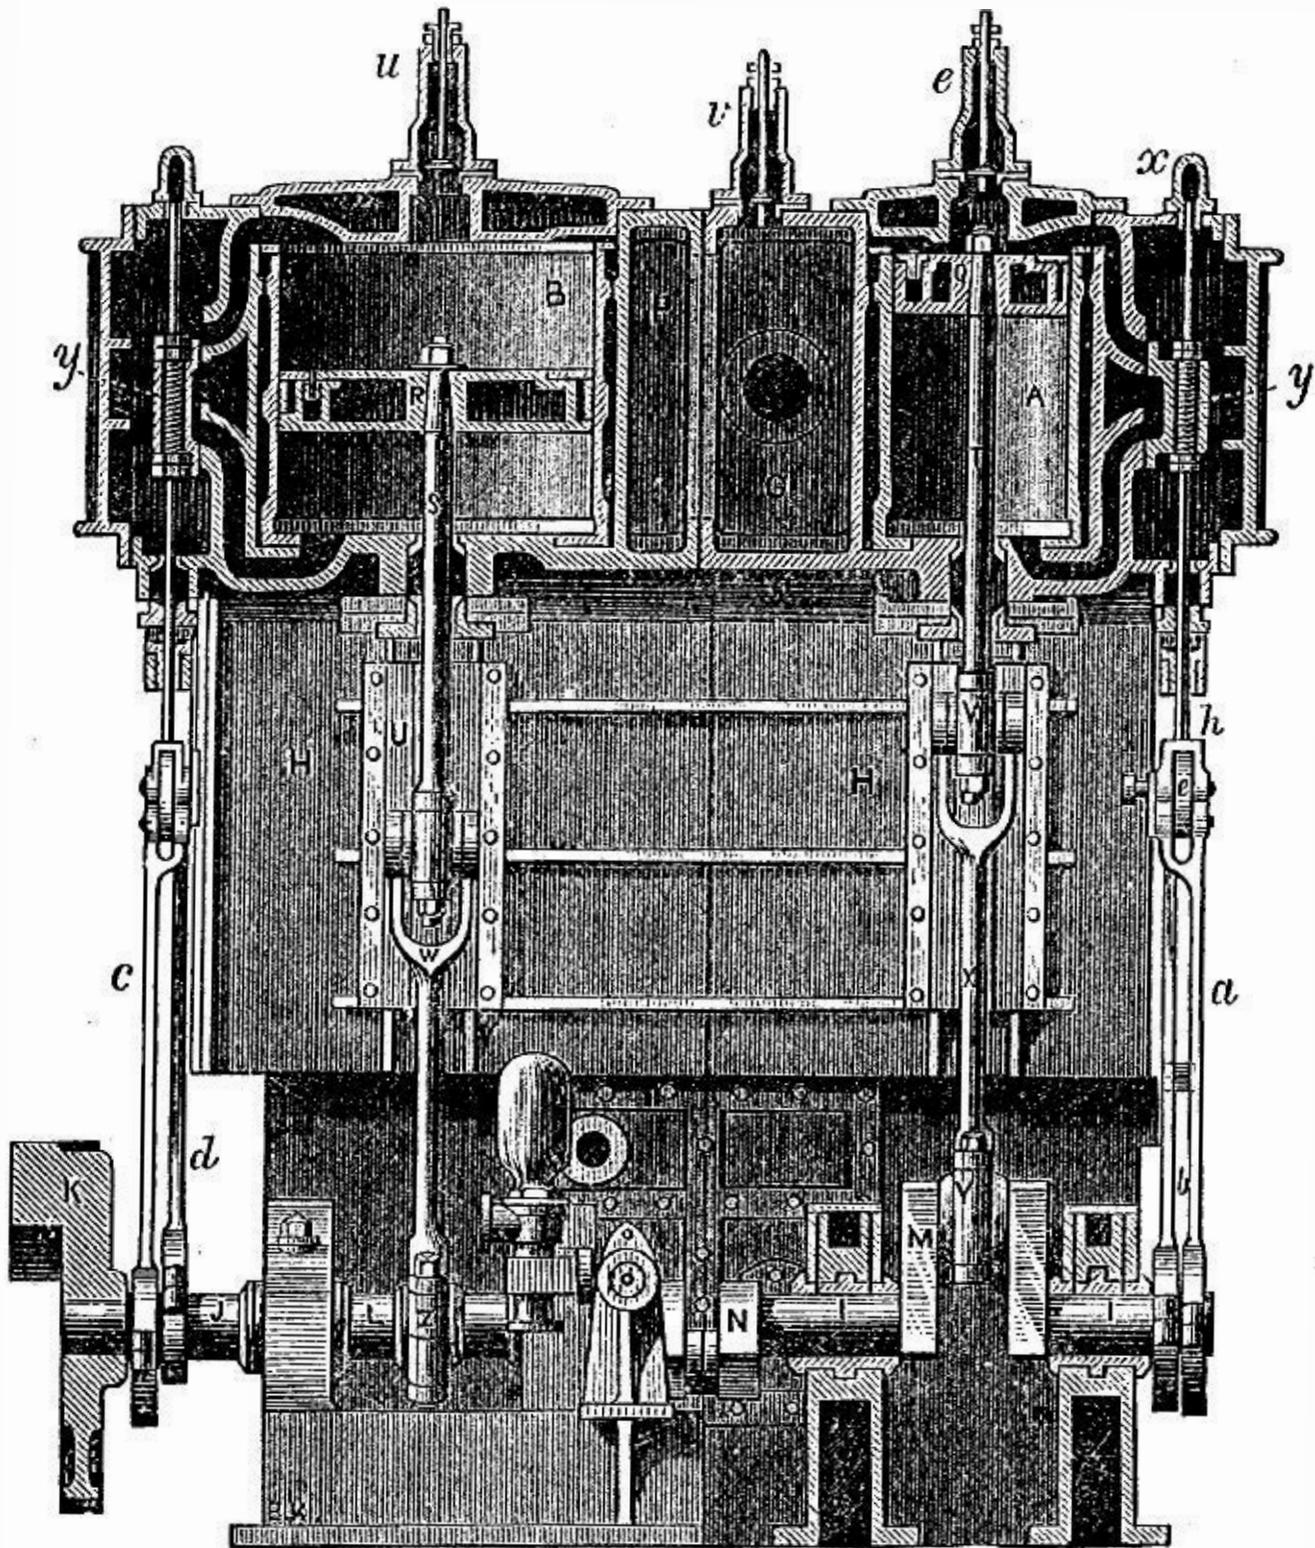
Compound Marine Engine. Front Elevation and Section.
